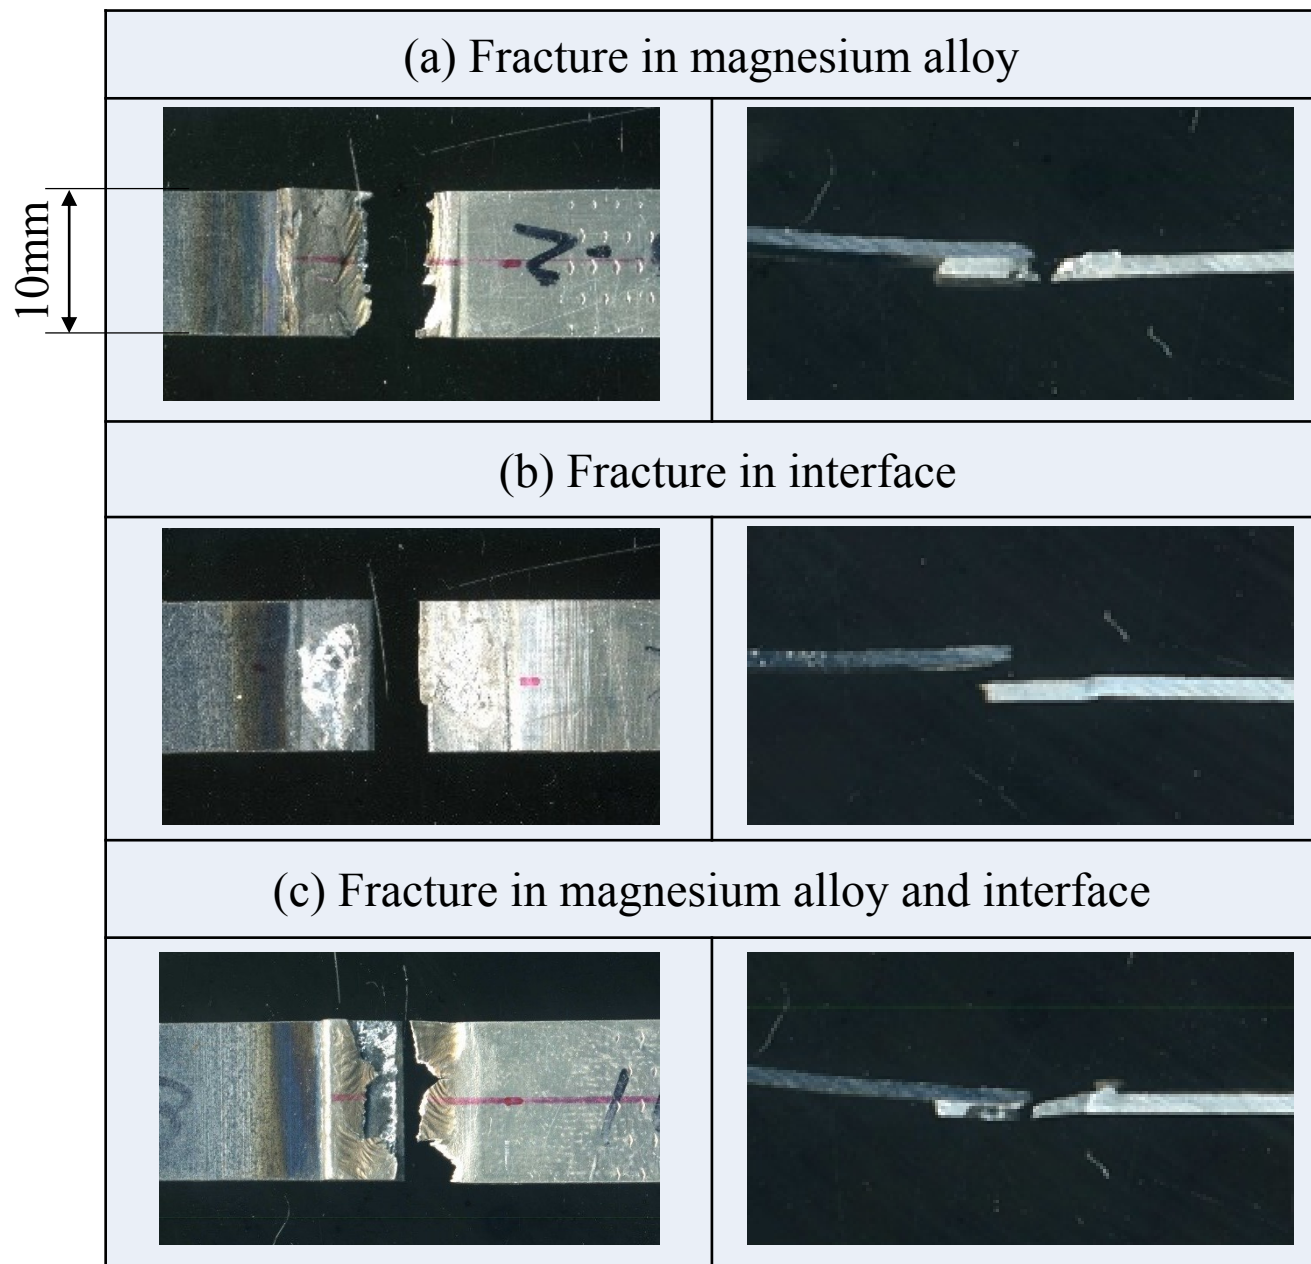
Appearance of fracture type of specimen after tensile shear test
